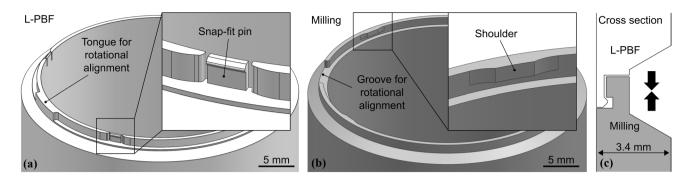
Snap-fit design with a L-PBF geometry with tongue and pin, b milling geometry with groove and shoulder, c schematic assembly design
